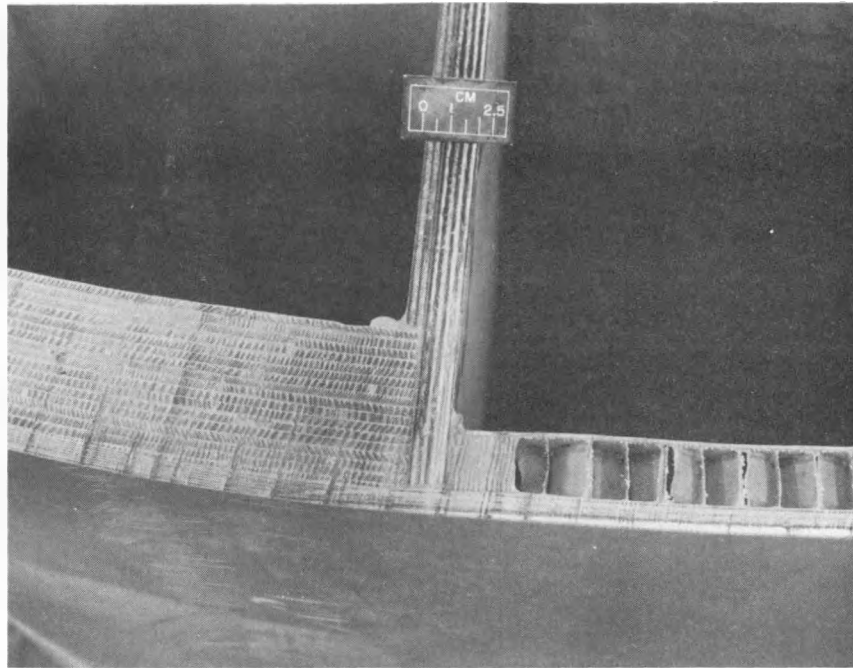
"D" Spar/Shear web/trailing edge connection of 20 foot wood specimen.
